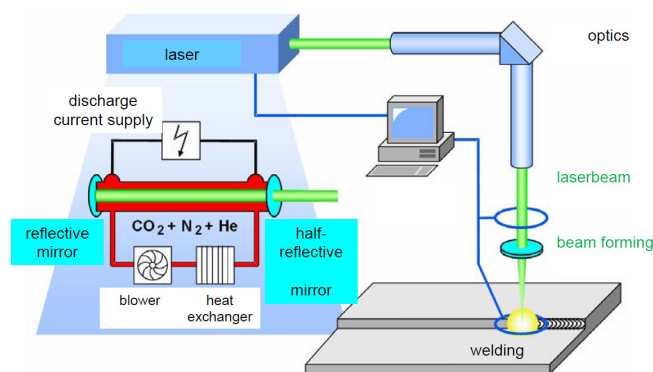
Schematic illustration of CO₂ laser welding [6].
